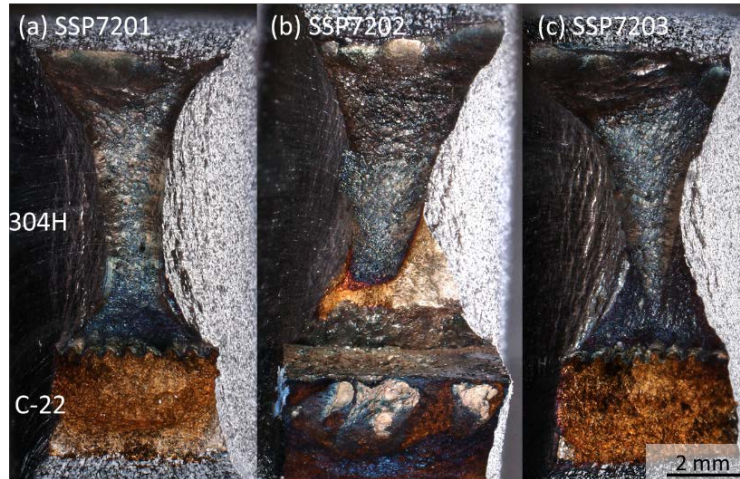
Fracture surfaces of 304H/C22 EXW arc pipe weld samples at 720°C: (a) SSP7201, (b) SSP7202, and (c) SSP7203
